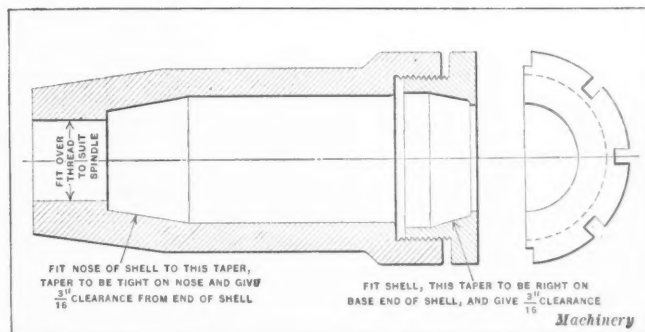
Type of Chuck used for holding Shell on Machine shown in Fig. 1
